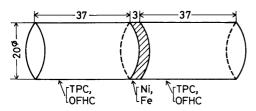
Arrangement of base metals for the diffusion welding.
